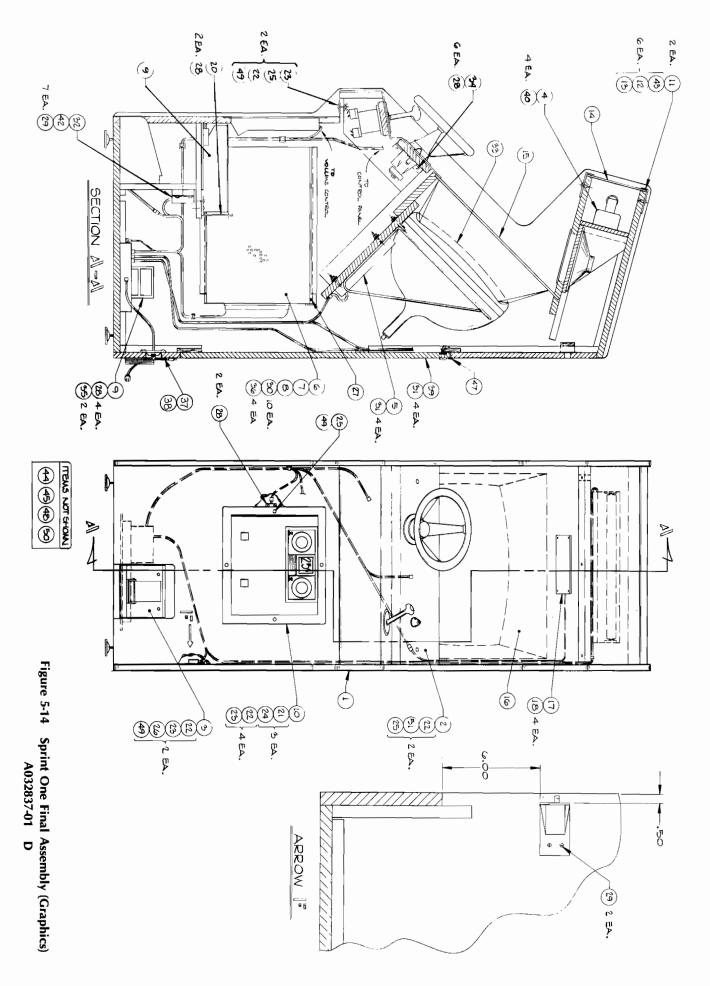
Sprint One Final Assembly (Graphics) Parts List
